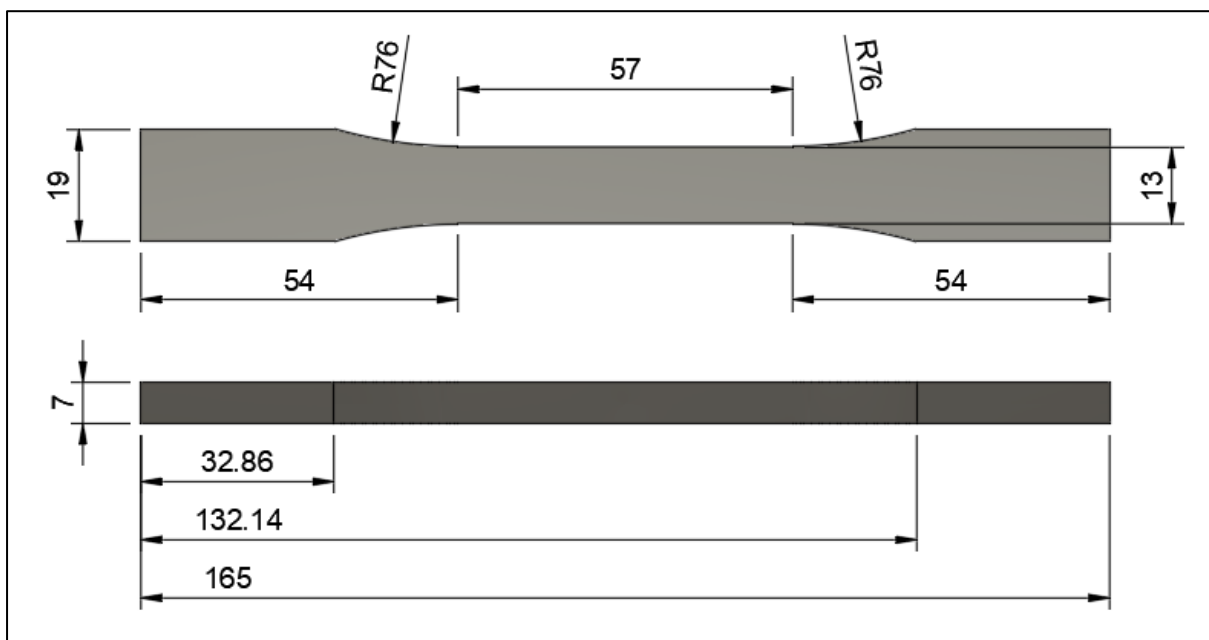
Technical Drawing for a Type I Specimen for ASTM D638.
